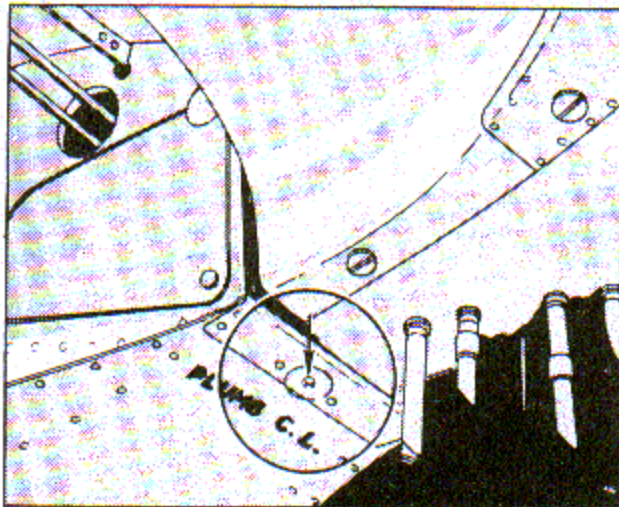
(Sheet 1 of 2)—Alignment Check Dimensions
